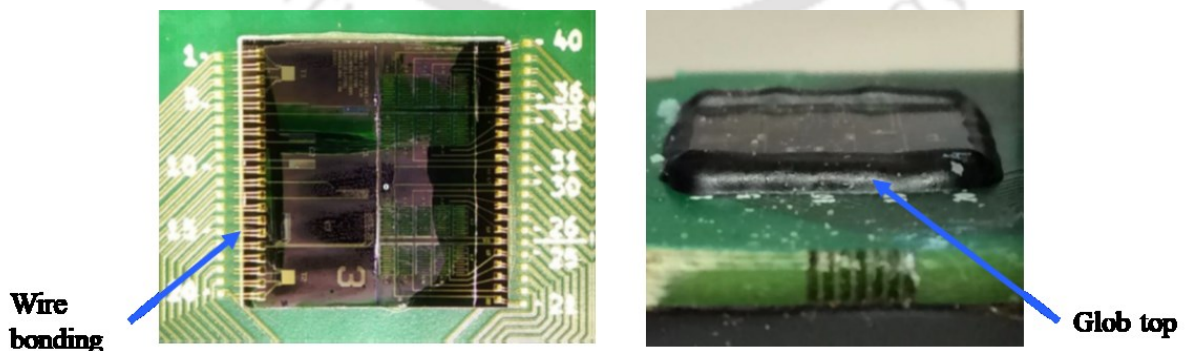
Silicon version sensor chip: Left - Top view showing wire bonding of the chip onto the support PCB, right
